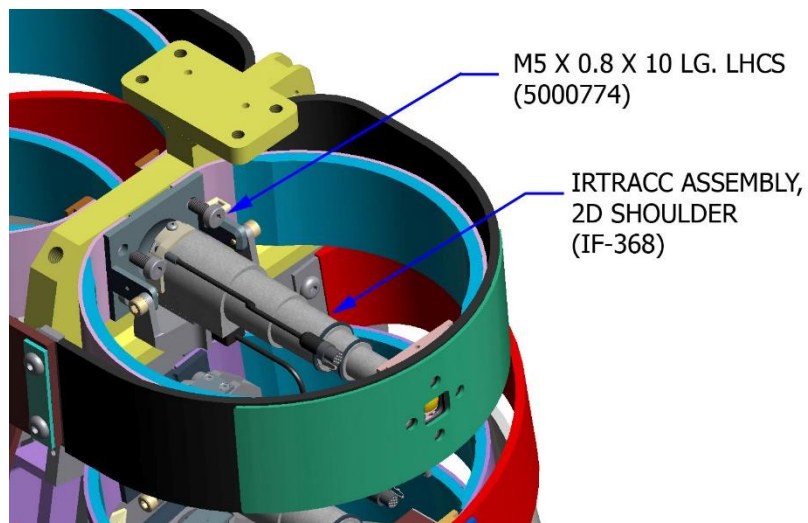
Removing shoulder rib 2D IR-TRACC from the side plate.
